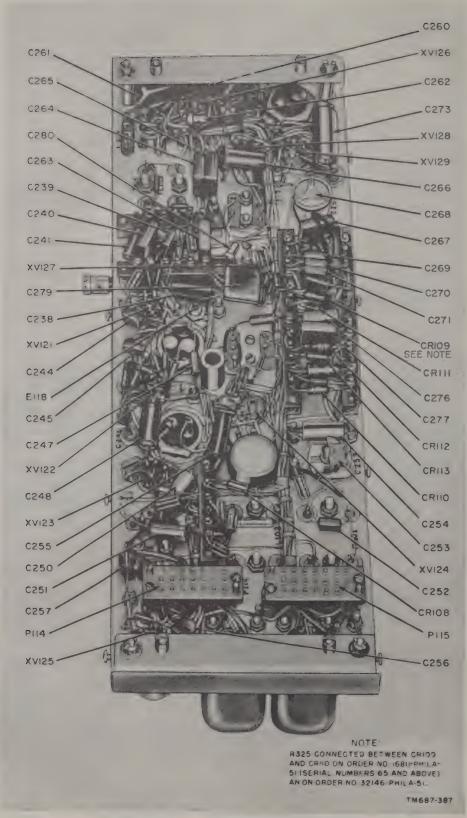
Receiver base-band amplifier plug-in assembly, bottom view showing capacitors.
